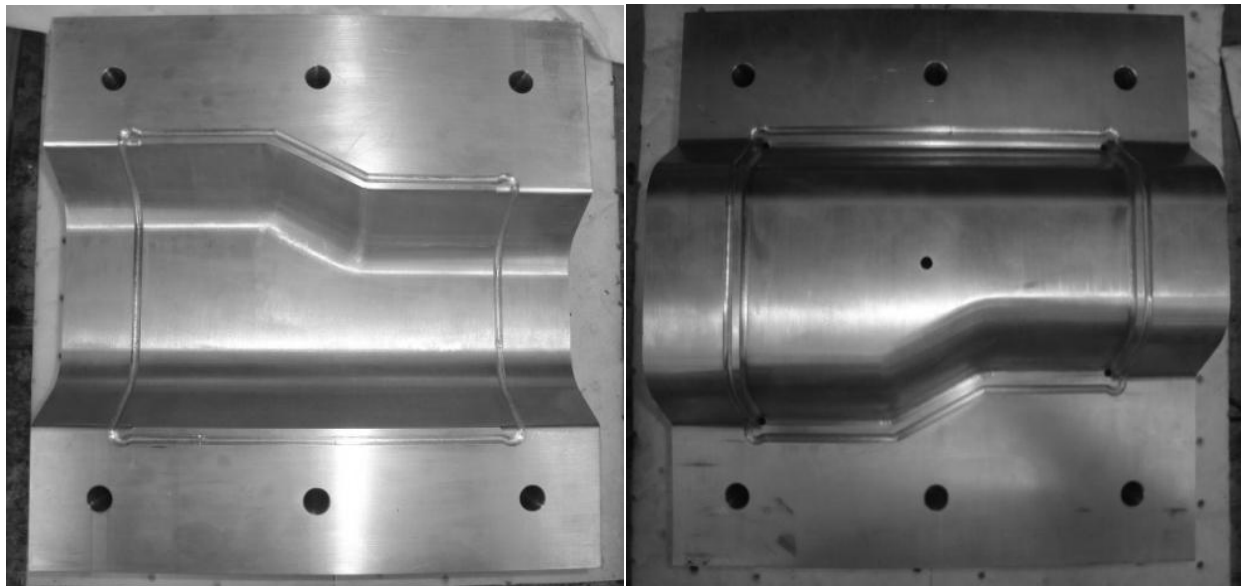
Top view the machined 3D mould: female mould (left) and male mould (right)
